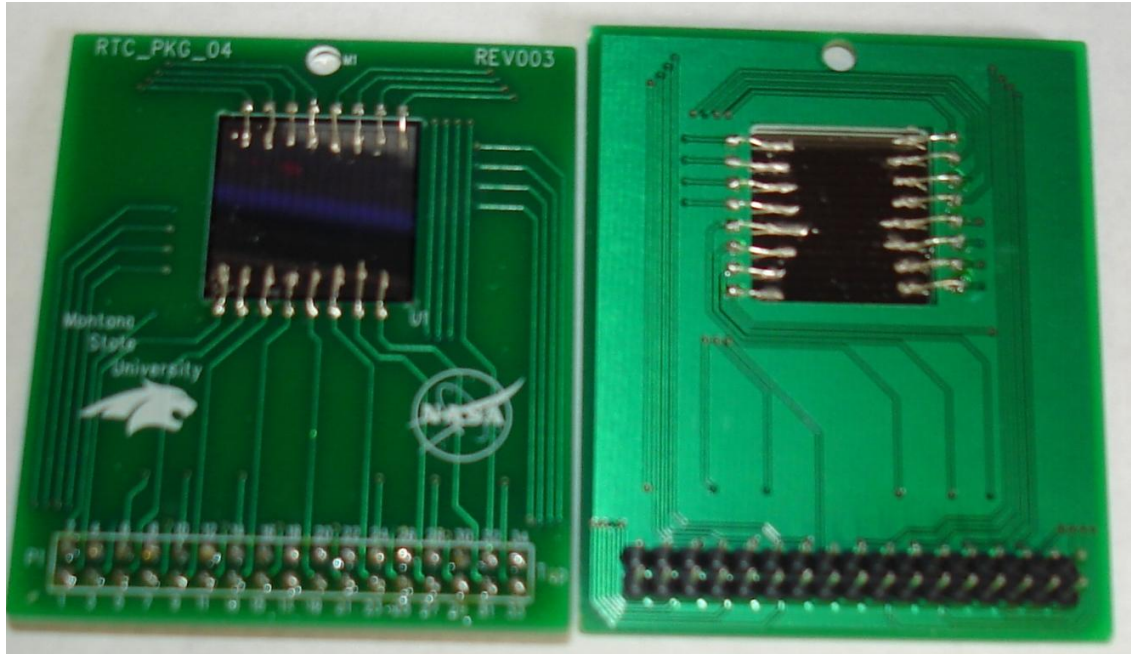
Picture of the radiation sensor mounted in to the fabricated PCB.
